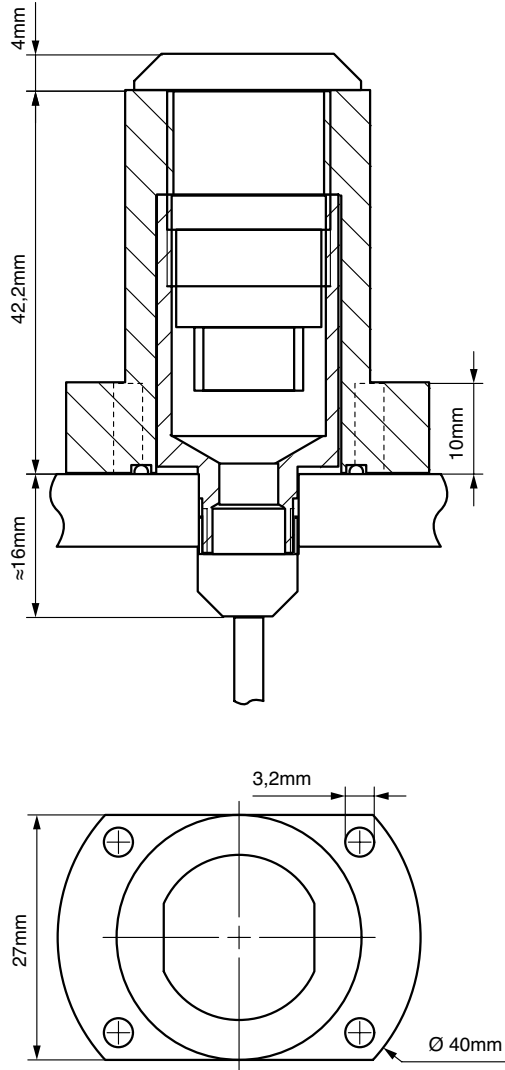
Sectional drawing and view from above of the flange for on-top mounting.
